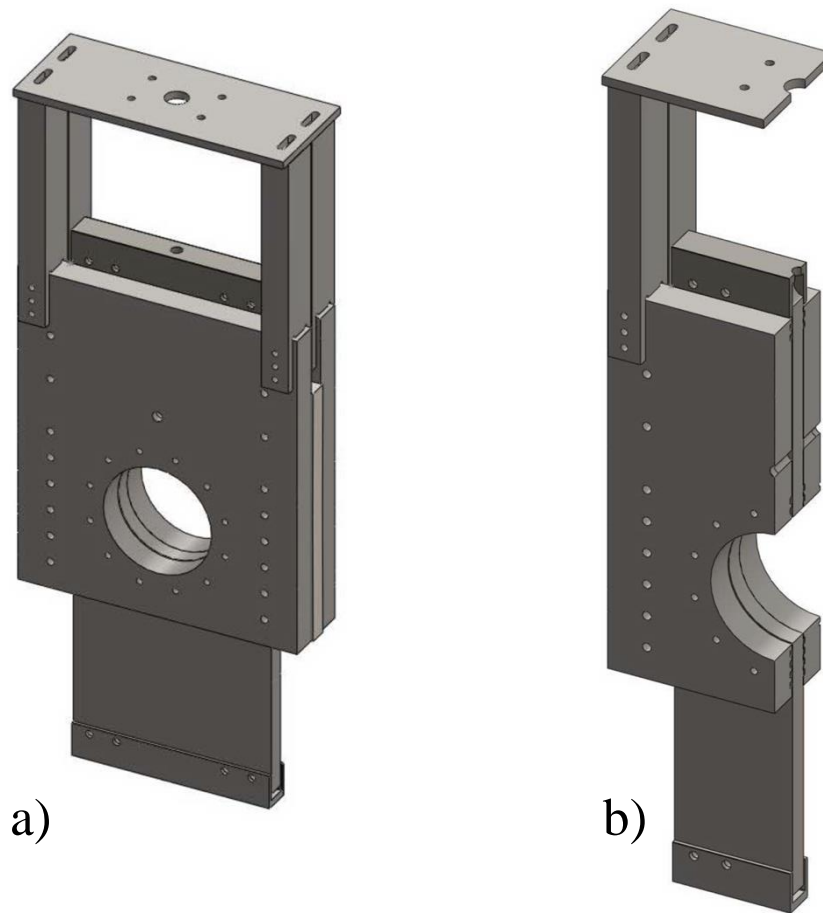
Views of the gate valve constructed for the aerosol shock tube. a) Isometric view; b) Isometric section view. The gate valve is in the open position.
